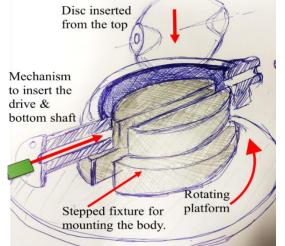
Assembling the body by mounting it over a centering fixture and performing the assembly on a rotating platform.
